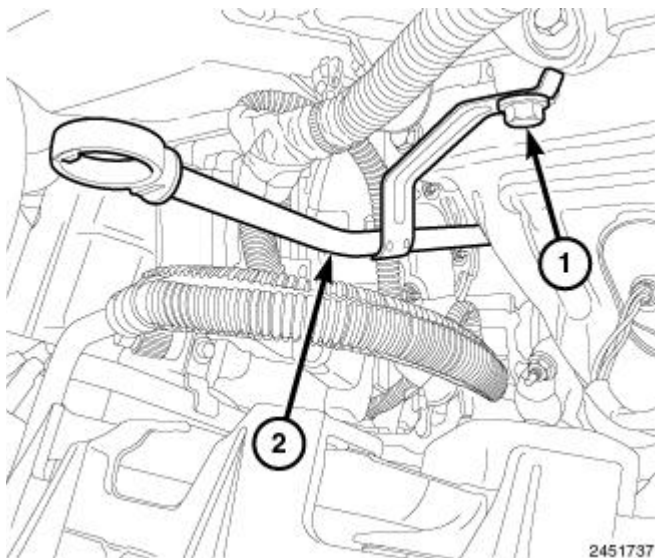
Identifying Oil Dipstick Tube & Bolt
